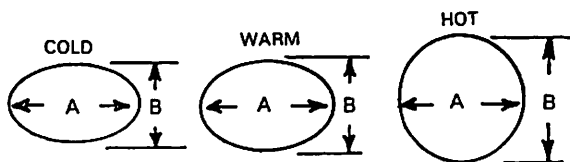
Cam ground piston becomes round when hot. Diameter A remains constant; diameter B expands.
